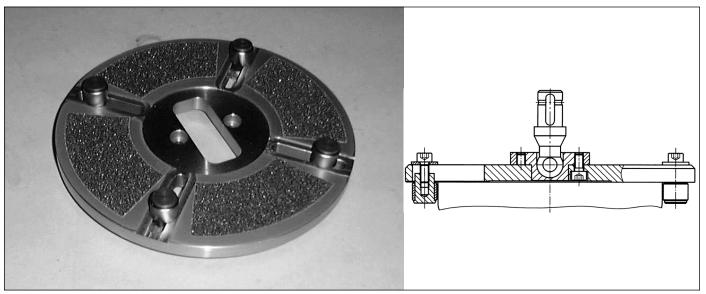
SOLID GRINDING DISC WITH ADJUSTABLE GUIDES FOR GRINDING OF VALVE PLUGS (OD-GUIDED)
